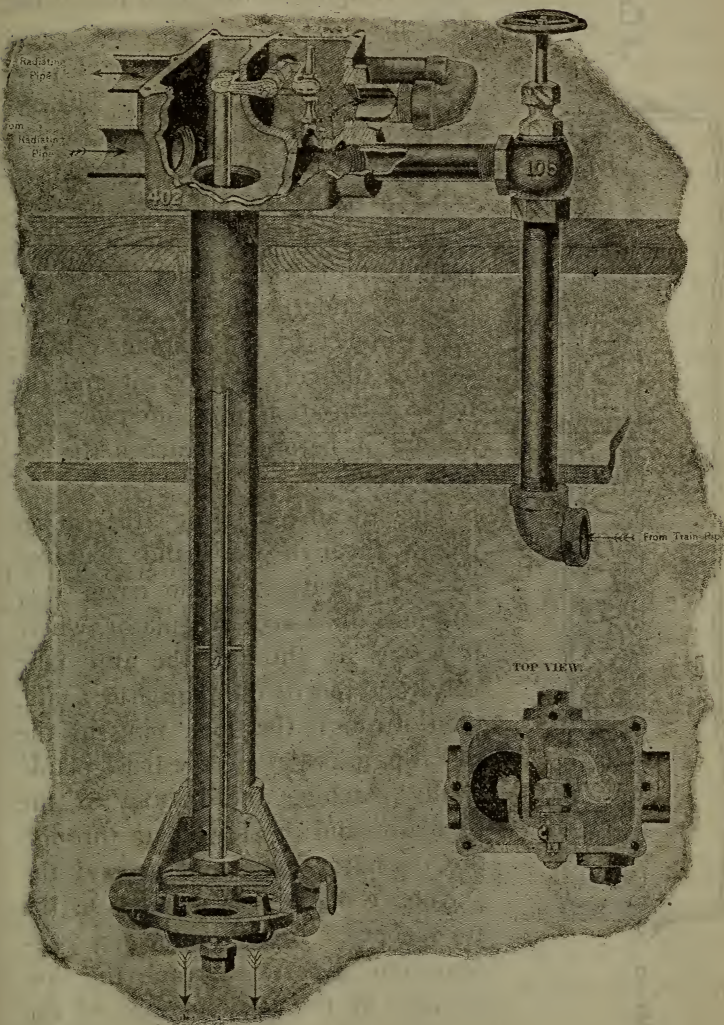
VAPOR HEATING—SECTIONAL VIEW.
